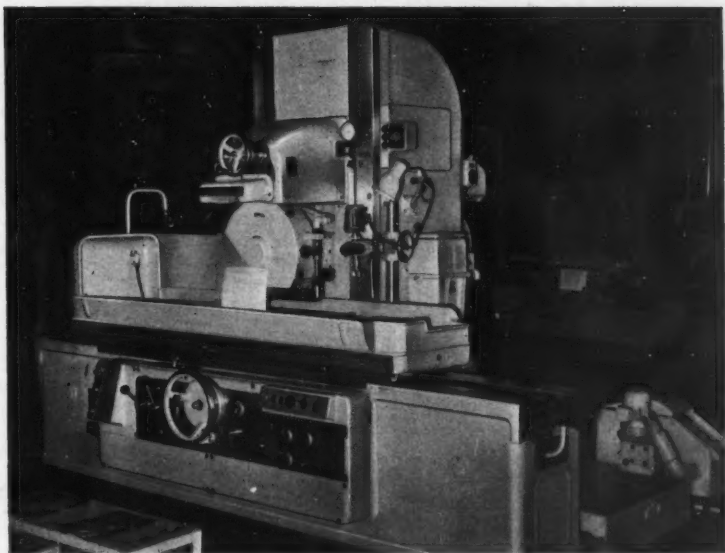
This type 3722, horizontal-spindle surface grinder, built by the Moscow grinding machine works, will accommodate work up to 15.75 in. high above the table, and can be operated on an automatic cycle
